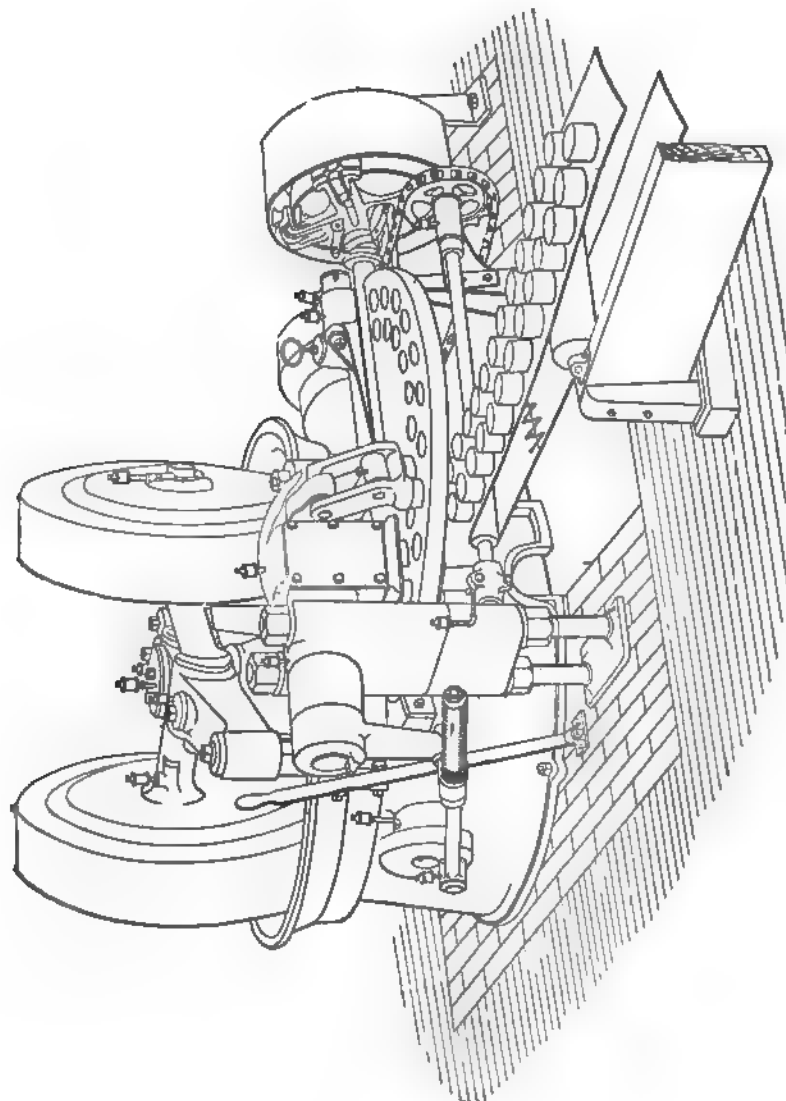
THE WHITE BRIQUETTING MACHINE.
